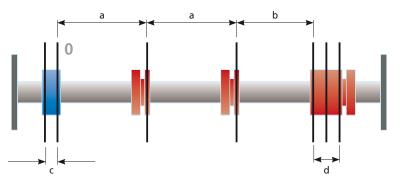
Movable saw configuration with one fixed and three movable saw bushes
